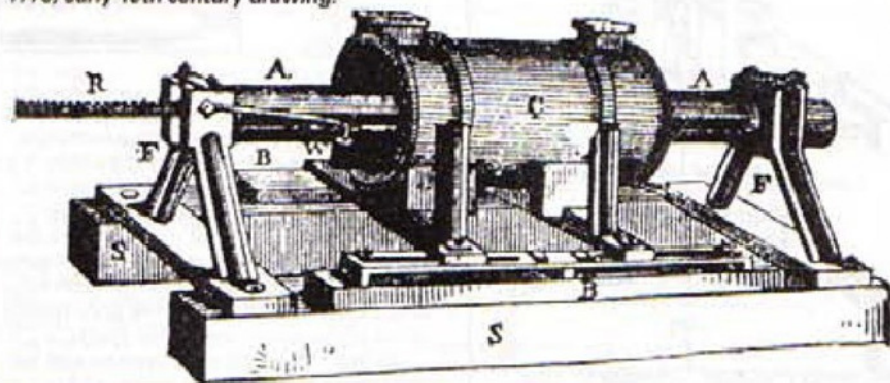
Smeaton's cylinder boring machine, 1769, early 19th century drawing.
